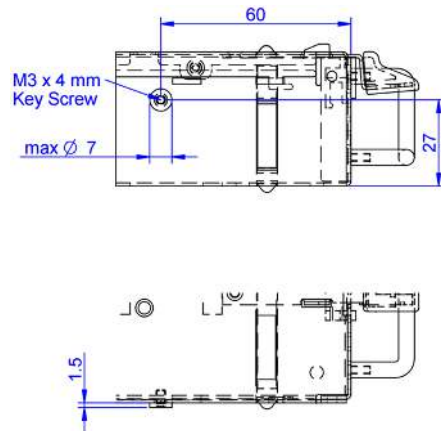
PFE3000-12-069RA with Key-in screw dimension (Option code S366)
